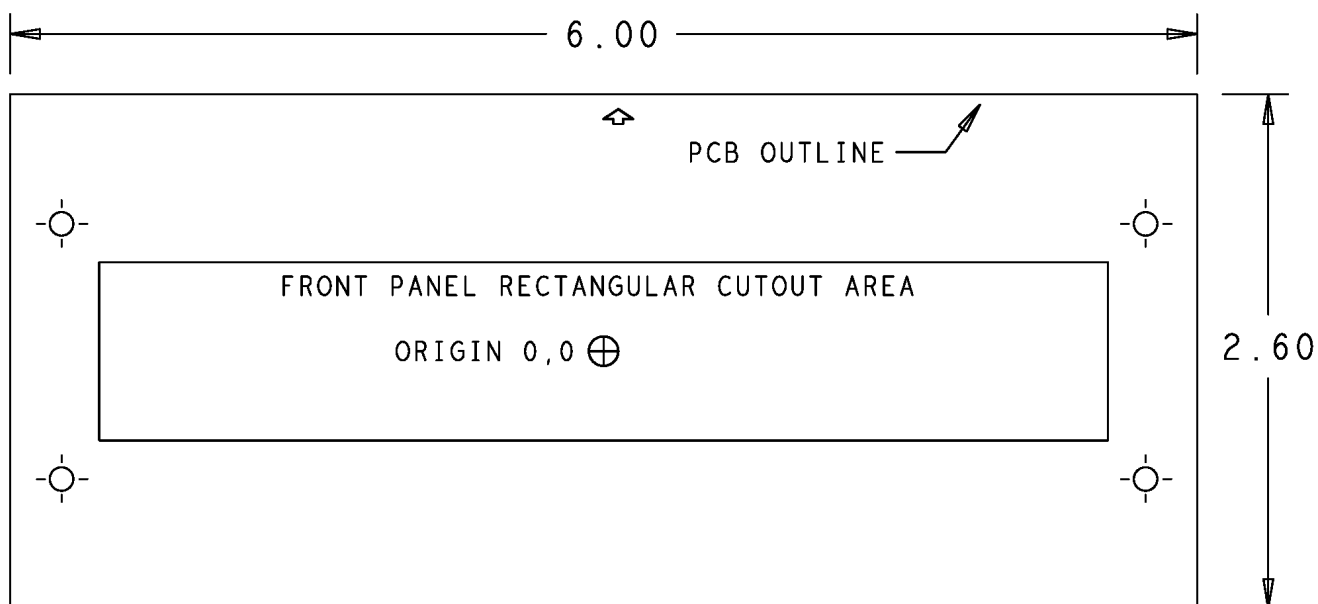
PCB MOUNTING GEOMETRY, PANEL REFERENCE
